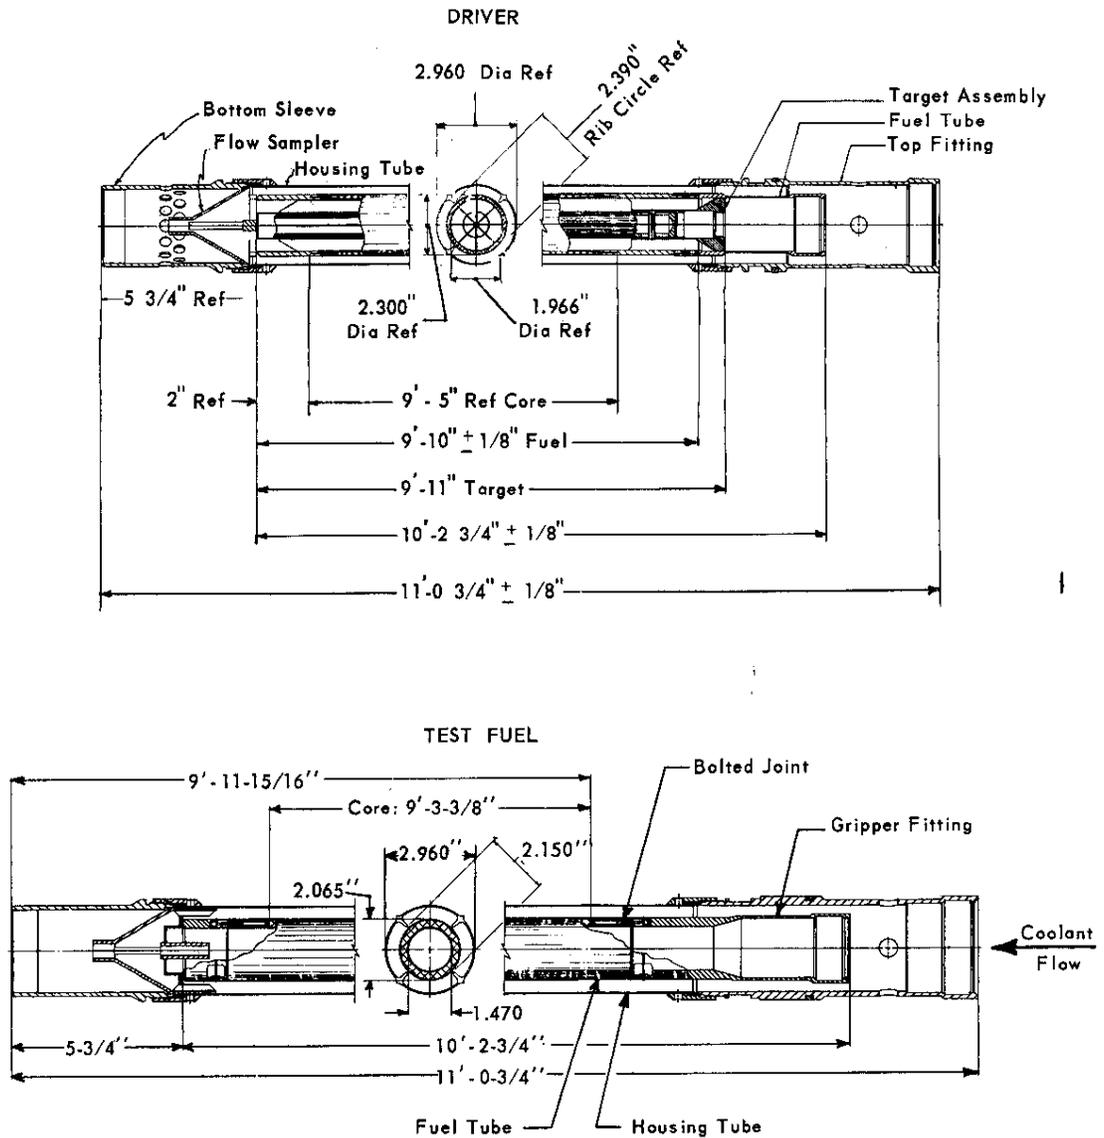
DRIVER AND TEST FUEL ASSEMBLIES
